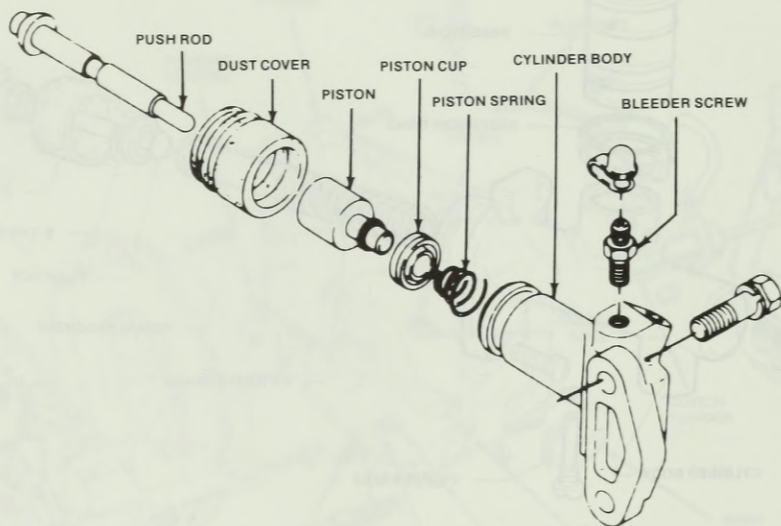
Exploded view of a slave cylinder. (Nissan Motor Corporation in USA)
